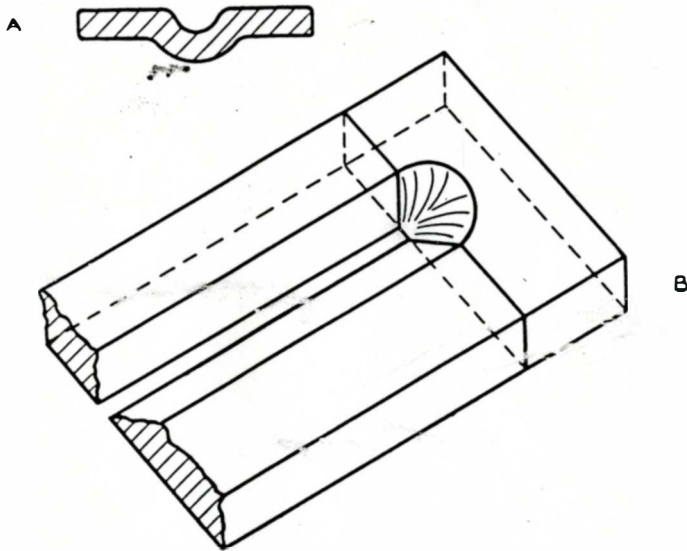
, A.—Section of copper backing bar; B.—Copper end piece.
